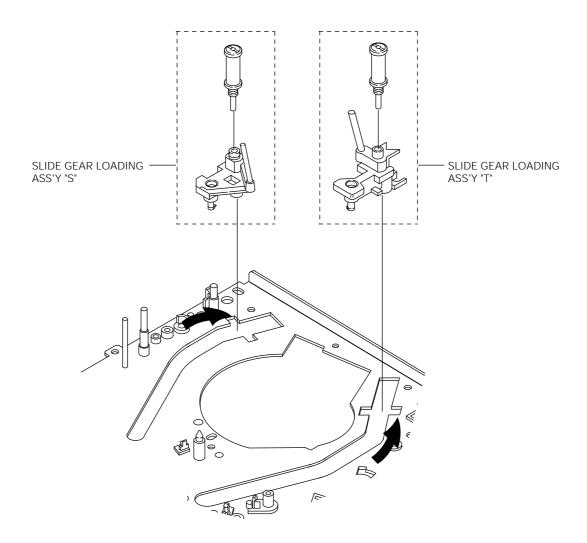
Slide Guide Roller "S", "T" Ass'y Removal
